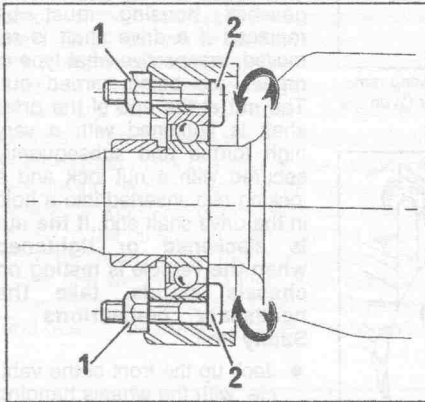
The two nuts (1) secure the intermediate shaft bearing. The bolt heads (2) on the inside must be rotated by a quarter of a turn to free the bolts.
